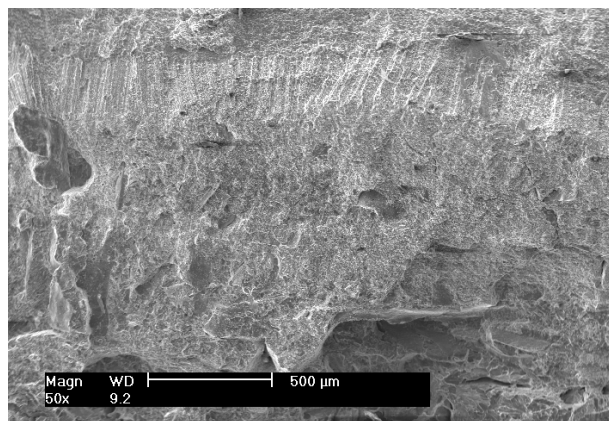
Surfaces of fracture of the welded joint in the case of welding steel Cr-3 and steel 20X23H18 by the help of an austenitic electrode O3Л-6
